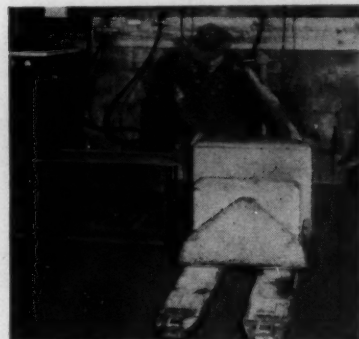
A 4-ft section of roller conveyor bed on which battery is rolled
